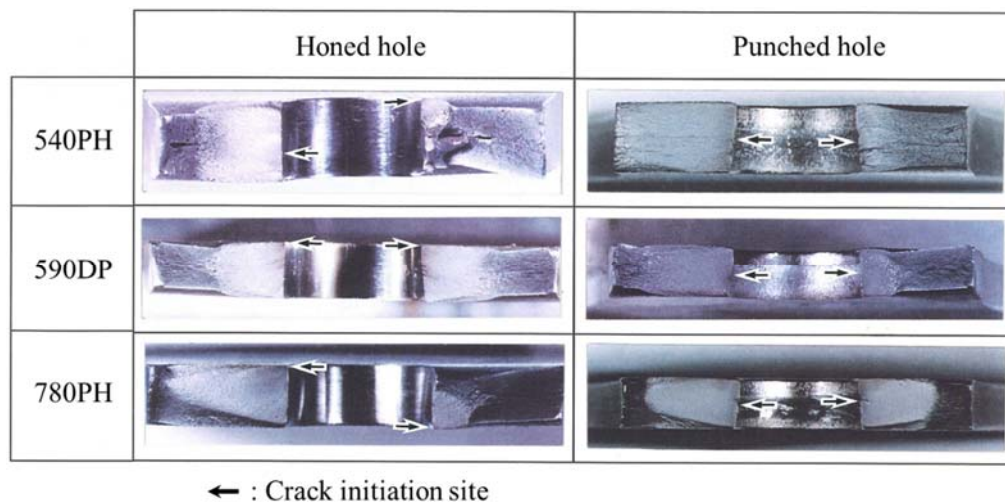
Fatigue fracture surfaces of honed and punched specimens.
